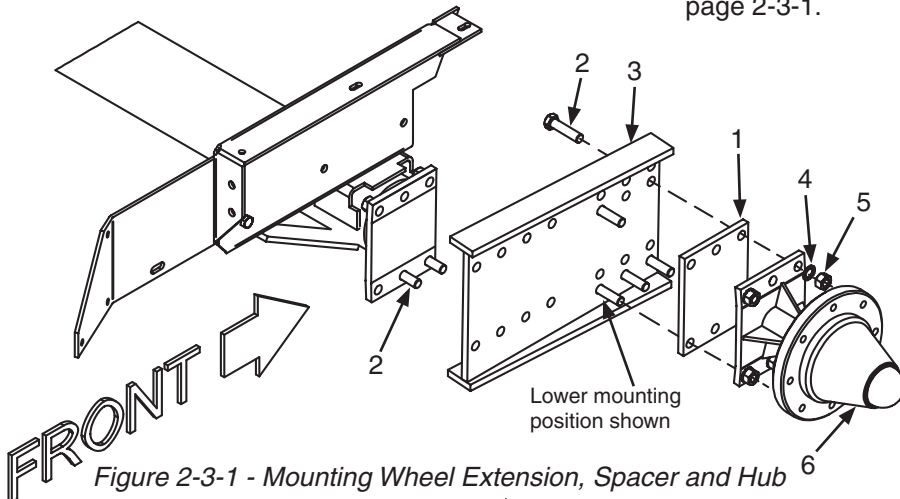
Mounting Wheel Extension, Spacer and Hub
